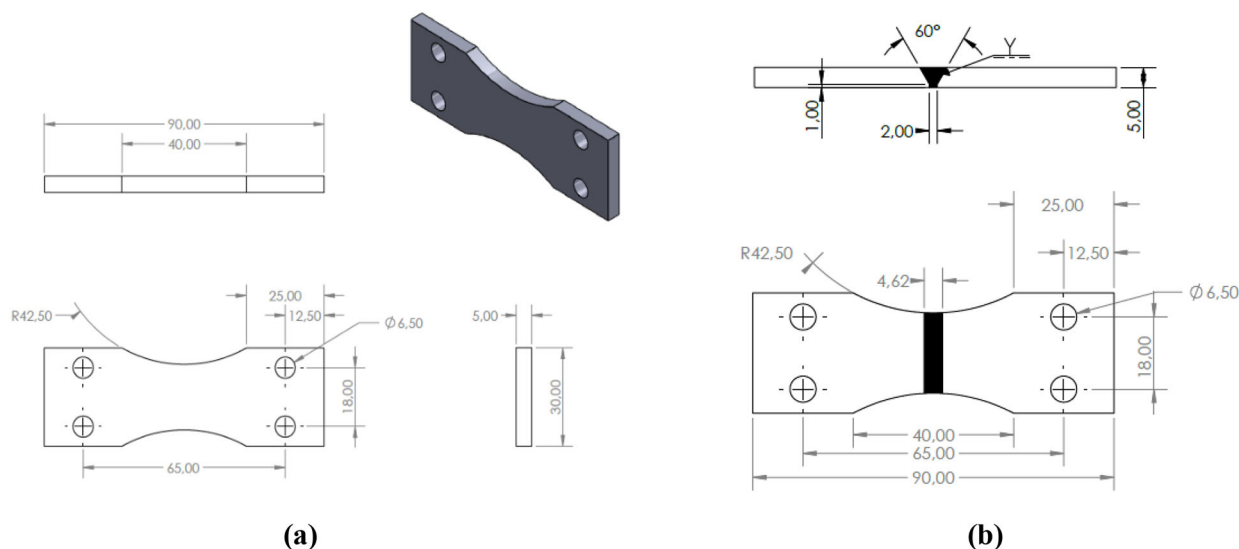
Fatigue Specimen JIS Z 2273: (a) without welded and (b) welded.
